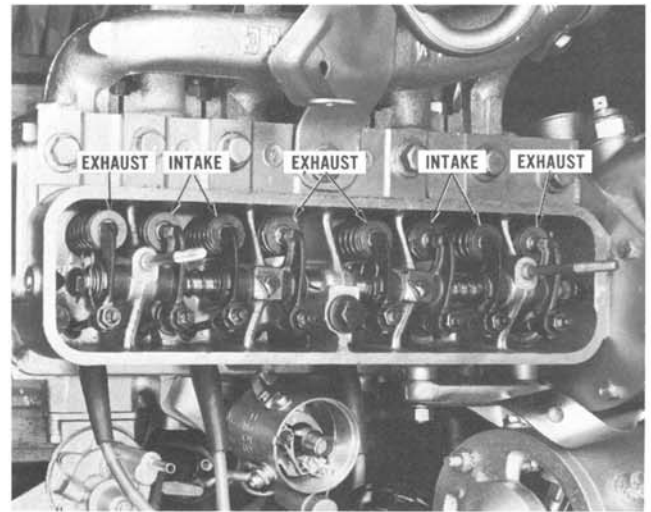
EXHAUST AND INTAKE VALVE LOCATION
